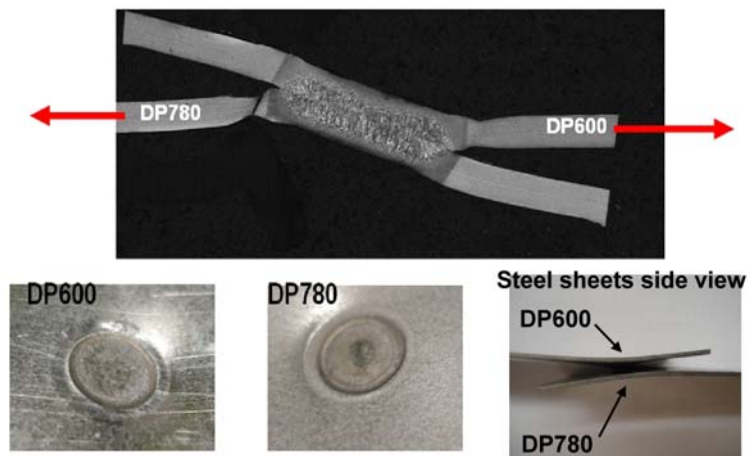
Cross-section of DP600_B-DP780_B partial lap-shear tensile test at 2.0 mm displacement of the crosshead just after peak load.
